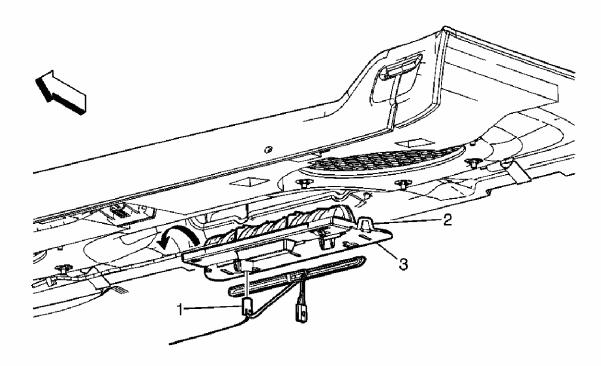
Identifying High Mount Stop Lamp Courtesy of GENERAL MOTORS CORP.
